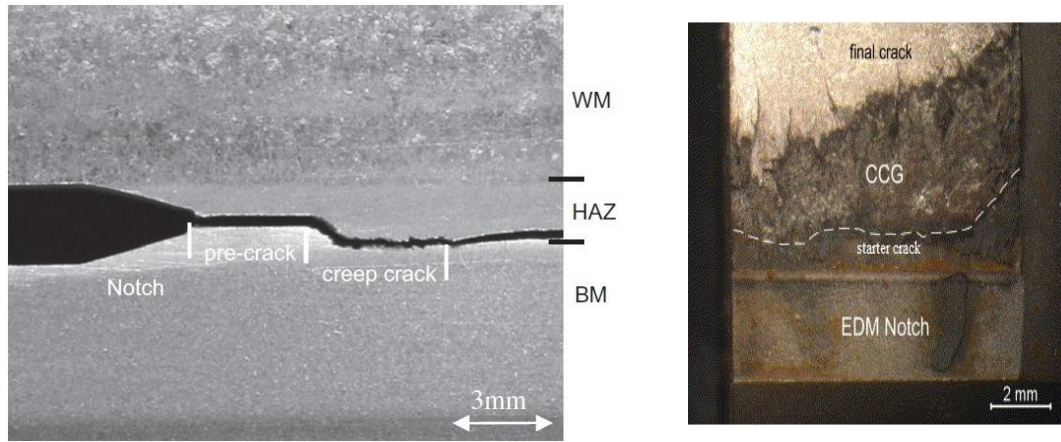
Creep crack growth in a welded joint [5]
